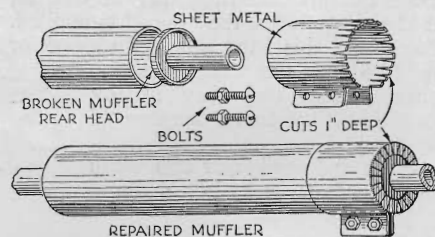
A blown-out muffler rear head can be repaired with sheet metal cut and fitted as shown
